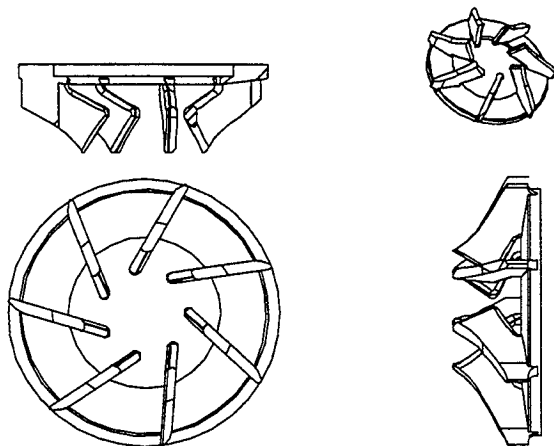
Centrifugal pump impeller with reduced axial height and blade thickness.
